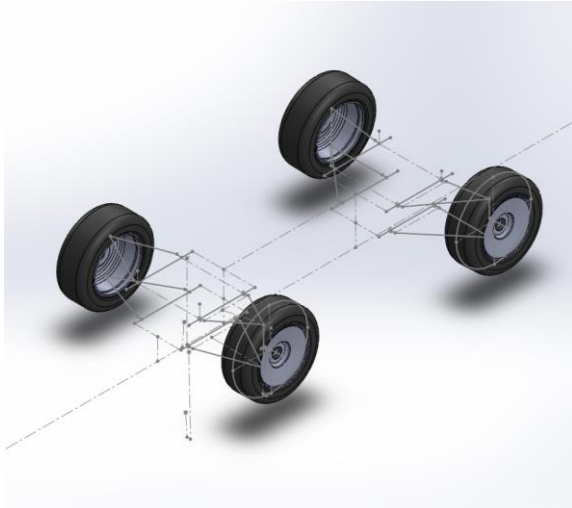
Suspension assembly with “suspension mockup” and “wheel” parts
